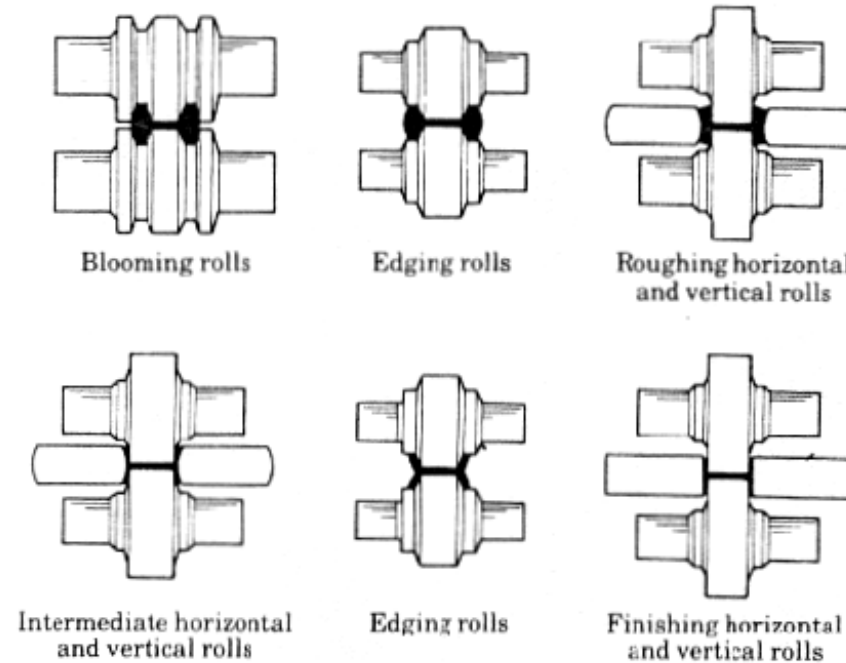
Stages in shape rolling of an H-section. Various large structural sections, such as I-beams, are made by this process.
